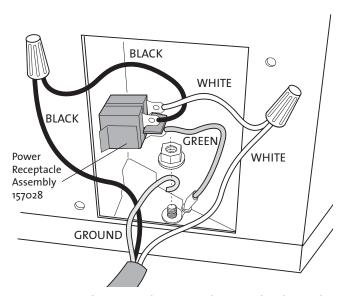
Hard wiring at the junction box. See also electrical wiring diagram, Appendix 10.3, page 38.
